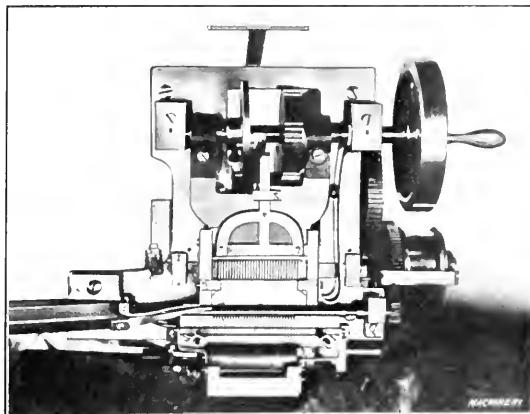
Top View of the Principal Part of the Pin-sticking Machine shown in Fig. 3
